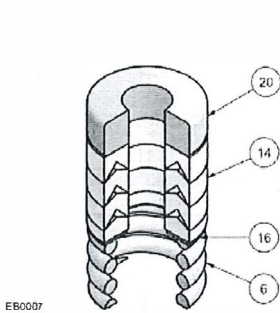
, Table 7. SPRING LOADED PTFE V-RING PACKING KIT P/N 24494T001
